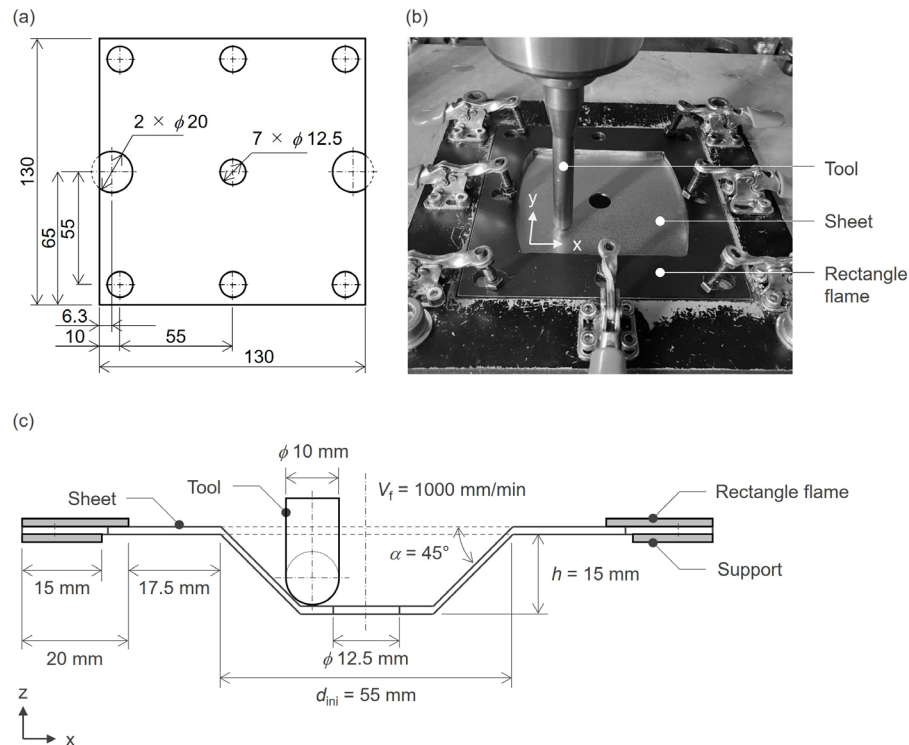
(a) Dimensions of initial sheet (b) Setup of incremental sheet forming, and (c) nominal geometry of tool path
